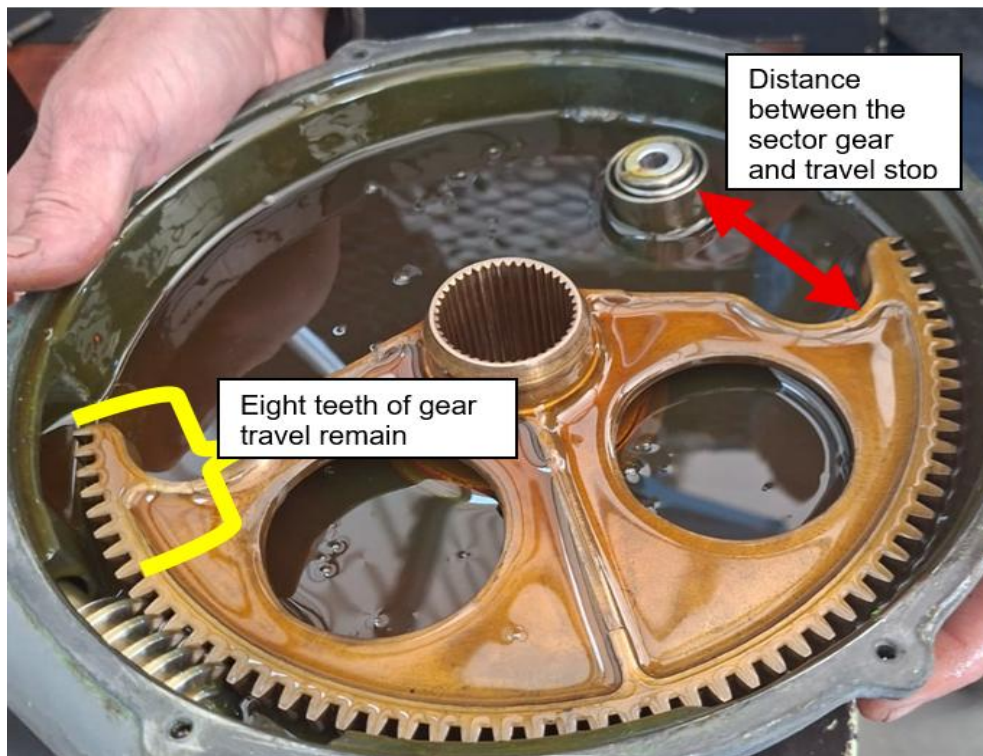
Inspection of the landing gear gearbox of the ZS-CHL aircraft.
